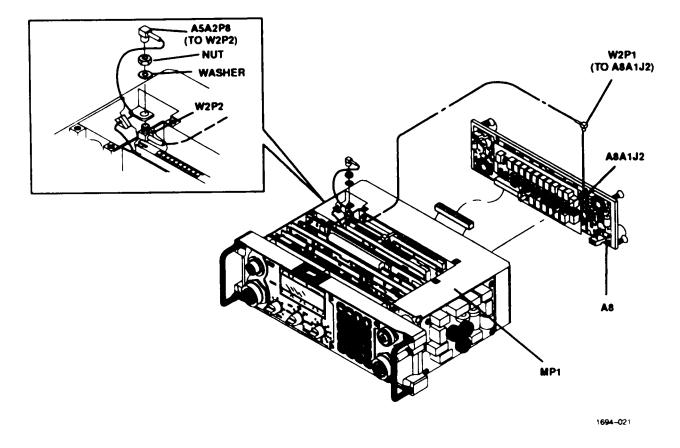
W2 Coaxial Cable Assembly Removal and Replacement
